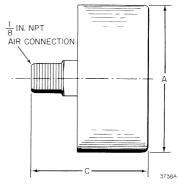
Stem-Mounted Gage Approximate Dimensions. Refer to Table 2.
